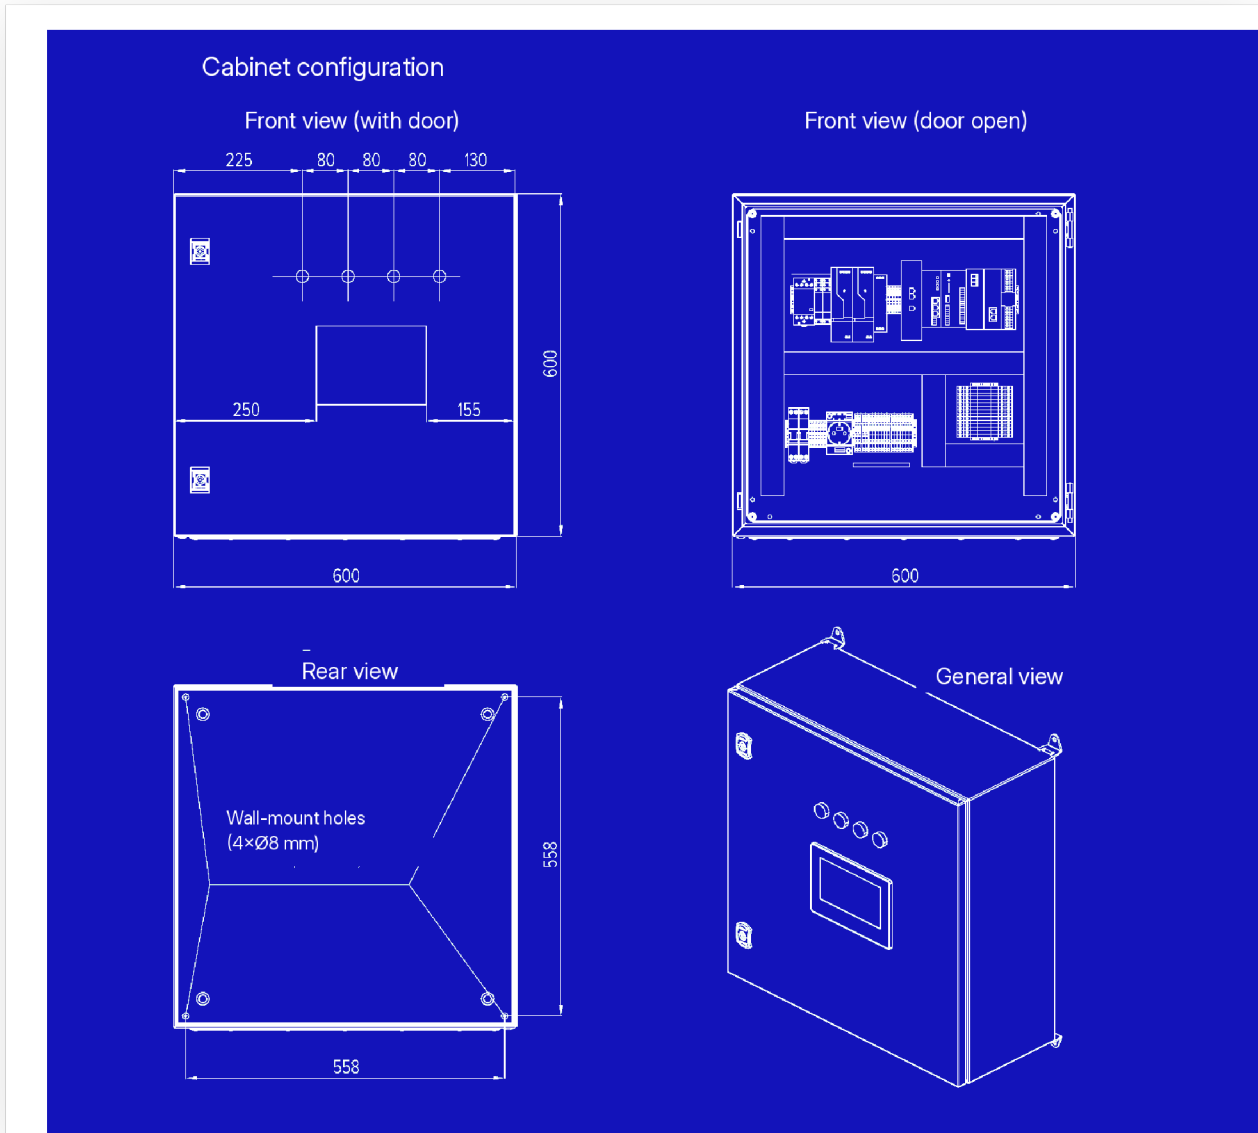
Cabinet configuration: front (door closed / open), rear mounting pattern and general view
